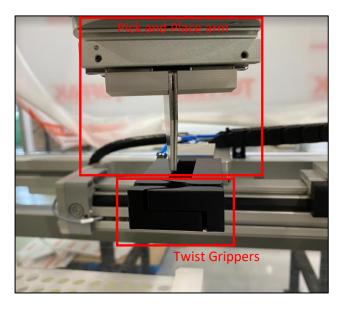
Station #2 showing the Pick and Place Arm and Stationary Grippers (Twist).
